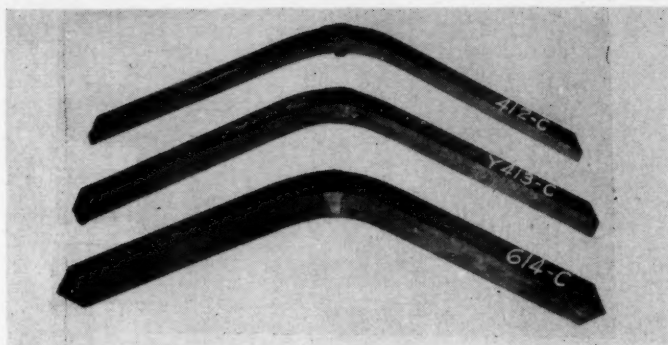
UNMACHINED BEND TEST SPECIMENS.
